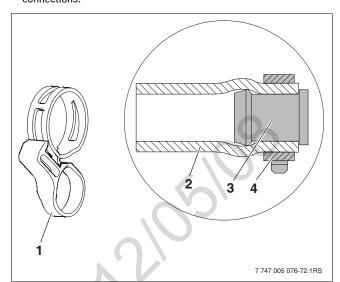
Hose clip with locking ring and pre-assembled dummy plug
